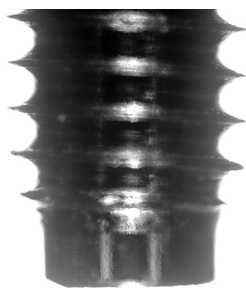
Image of a right hand machine screw. The right hand thread of the screw appears left handed, due to the z-inversion.
